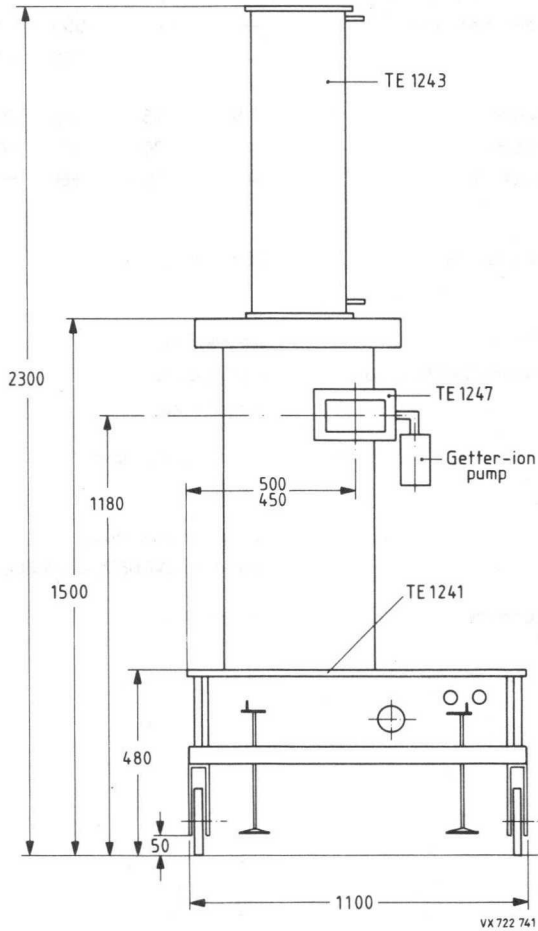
Complete assembly consisting of tube, trolley, oil tank, focus mount, r.f. transition and operational lead shieldings.
